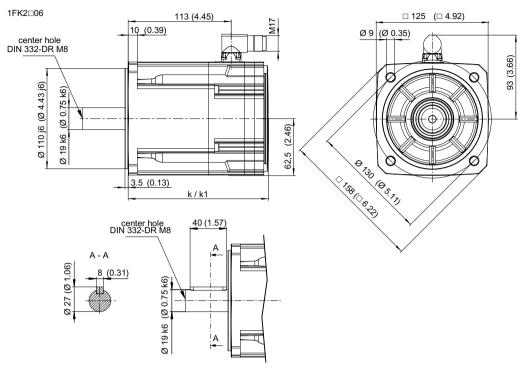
Dimension drawing_1FK2206-2AF00-0SA0
